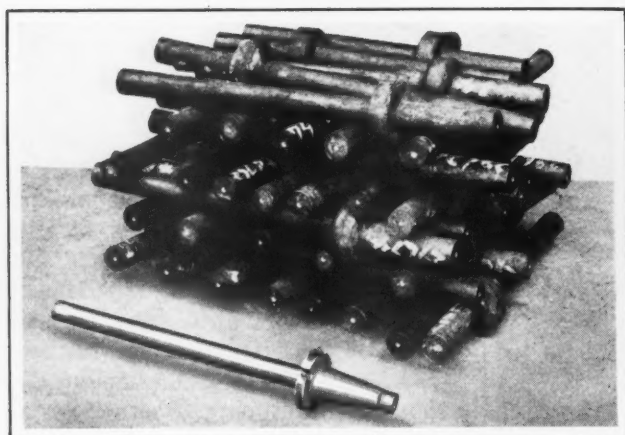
A Pile of Milling Machine Arbor Forgings and a Finished Arbor
